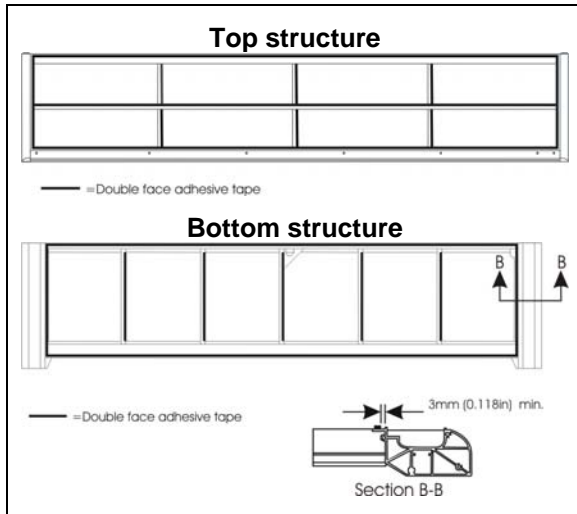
TOP AND BOTTOM PANEL INSTALLATION - DOUBLE FACE ADHESIVE TAPE APPLICATION
